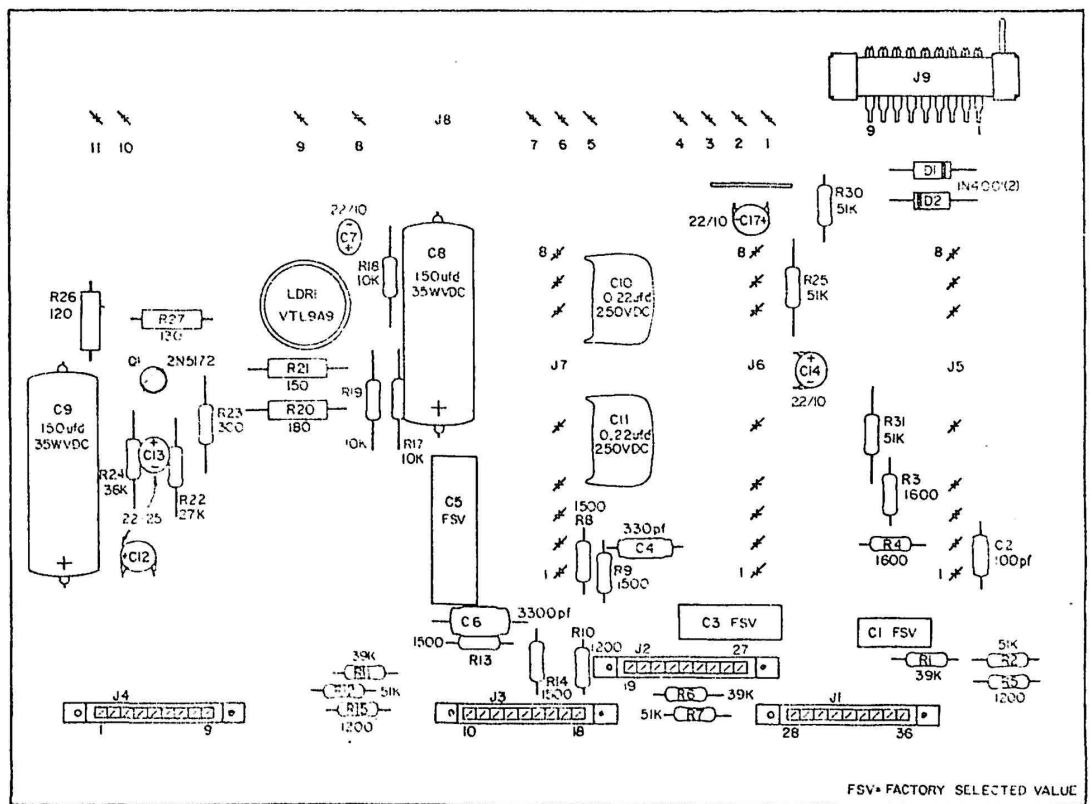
MASTER BOARD COMPONENT LOCATIONS
